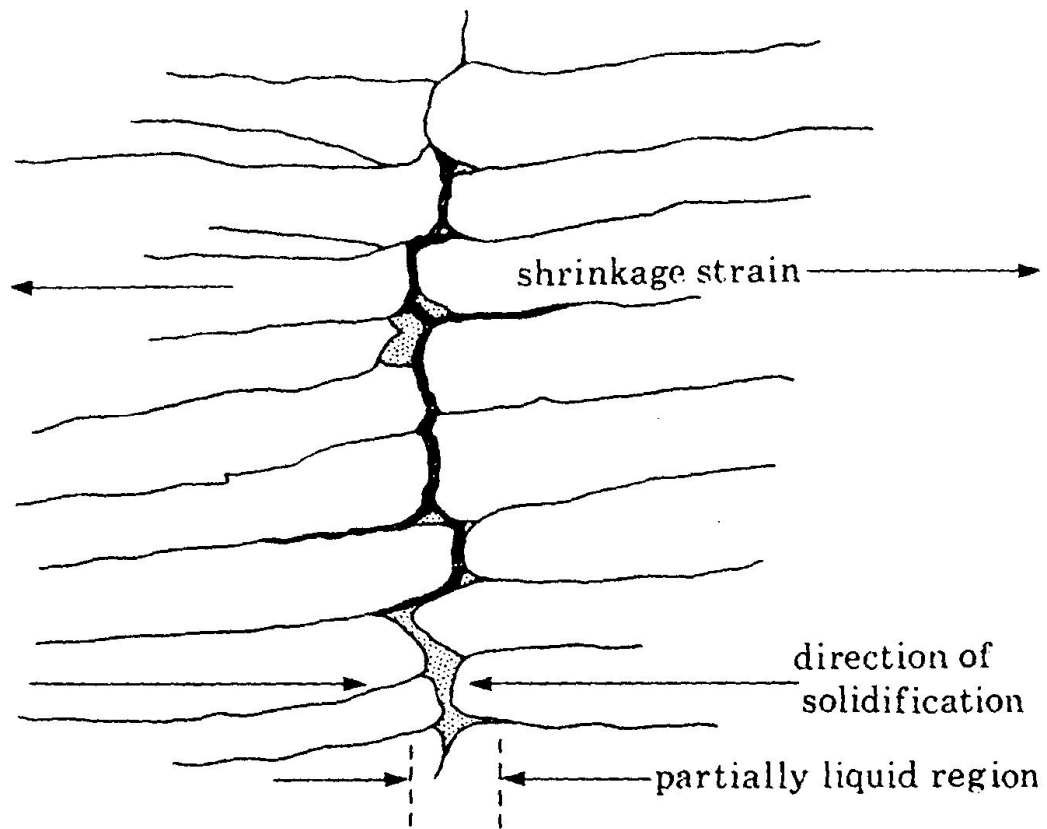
9: Schematic illustration of the mechanism of solidification cracking.
